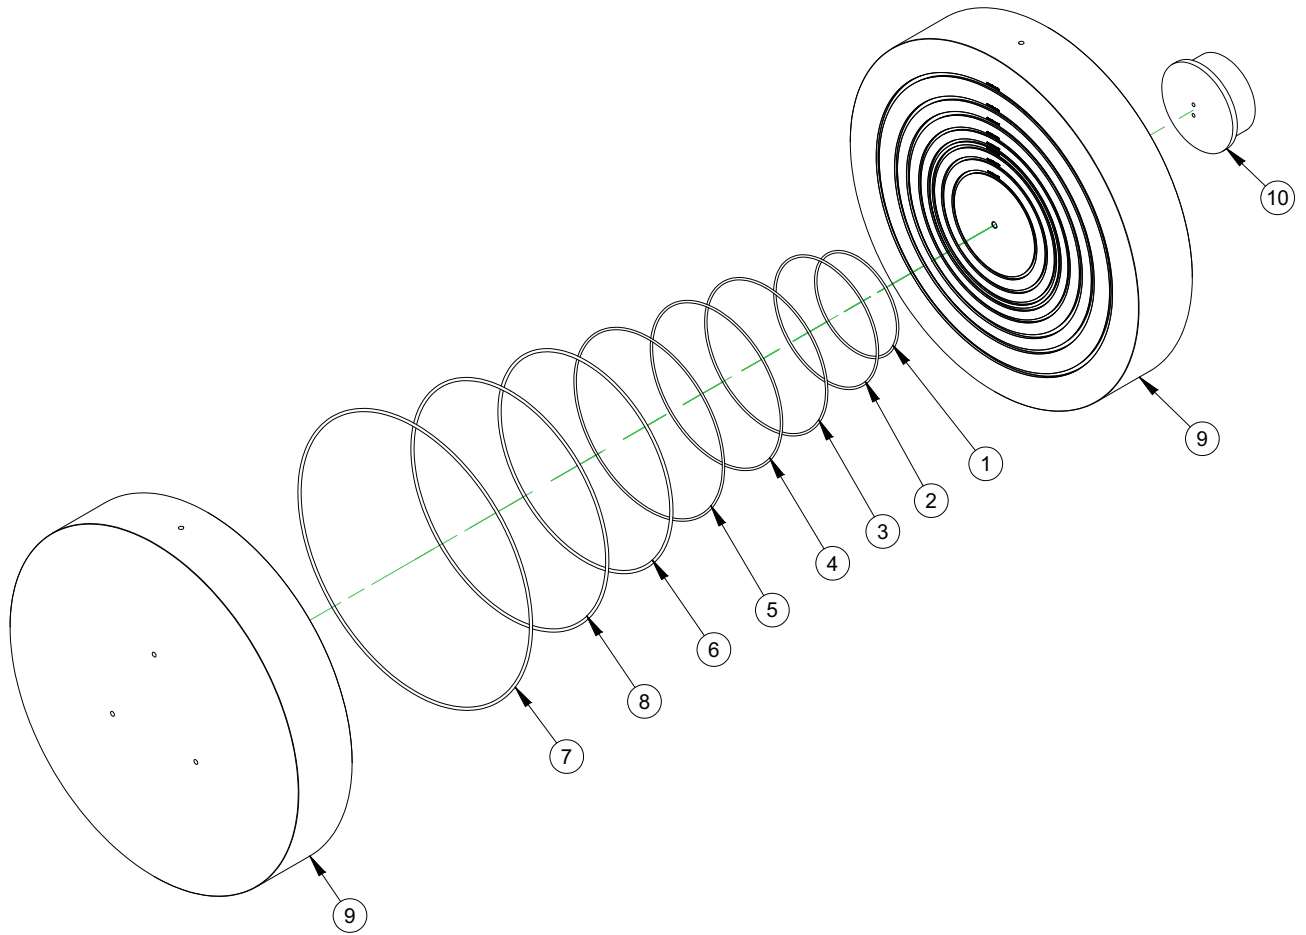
TILT MODEL KIT PARTS LIST (P/N 90056)
